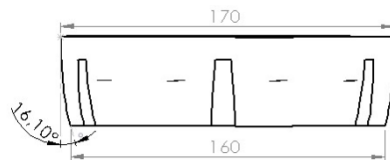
Actual geometry of the Gearbox housing.[7]
